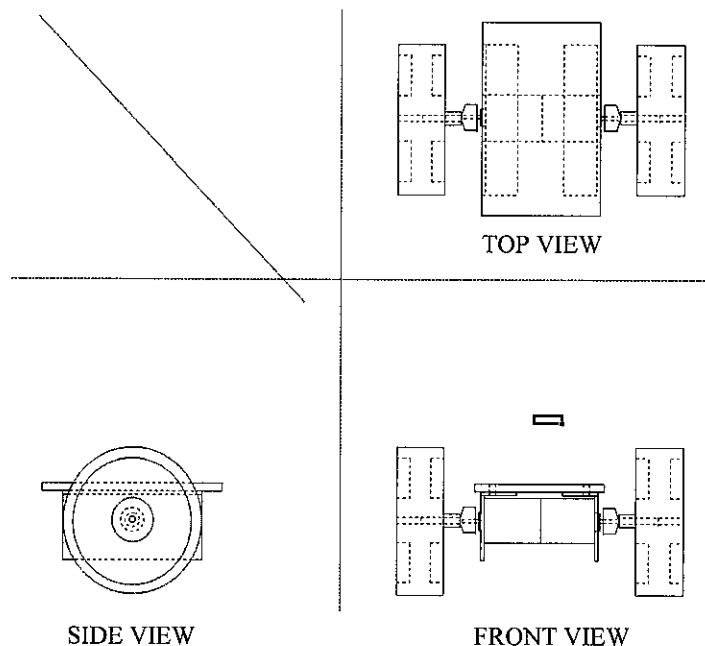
INITIAL ROBOT STRUCTURE DRAWING
